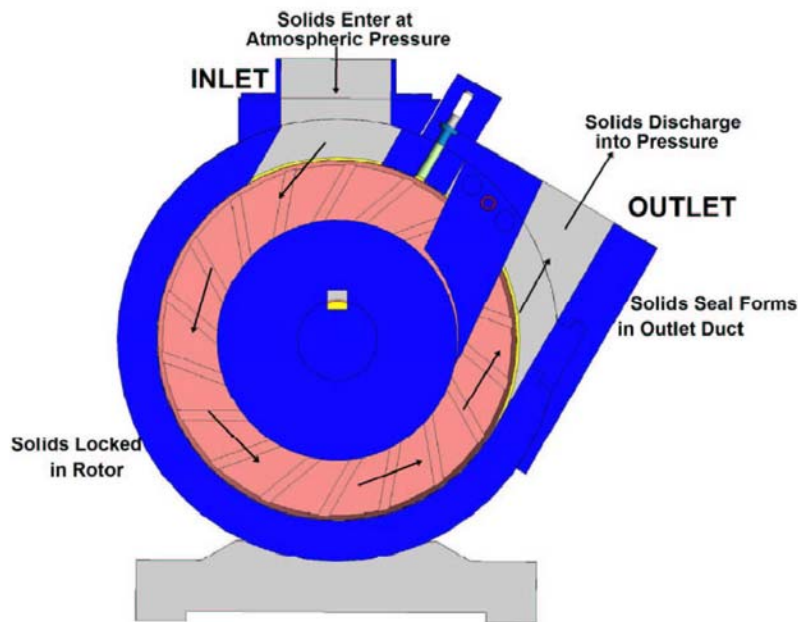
Layout of Stamet Posimetric[®] Pressure Feeder
